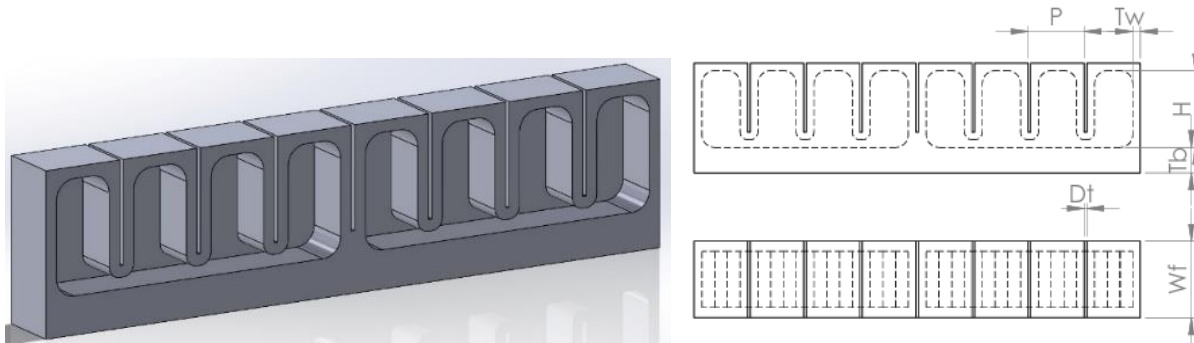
Morphology of the soft pneumatic actuator (SPA) designed using computer-aided design (CAD) software SOLIDWORKS
